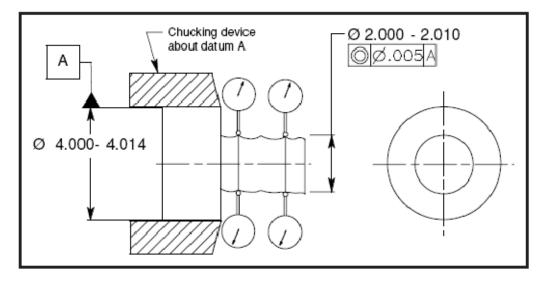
Inspecting a part with a concentricity tolerance.
